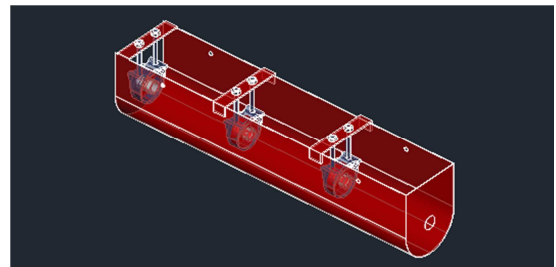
Design Shape of Cover Screw Conveyor and Hanging Bearing
